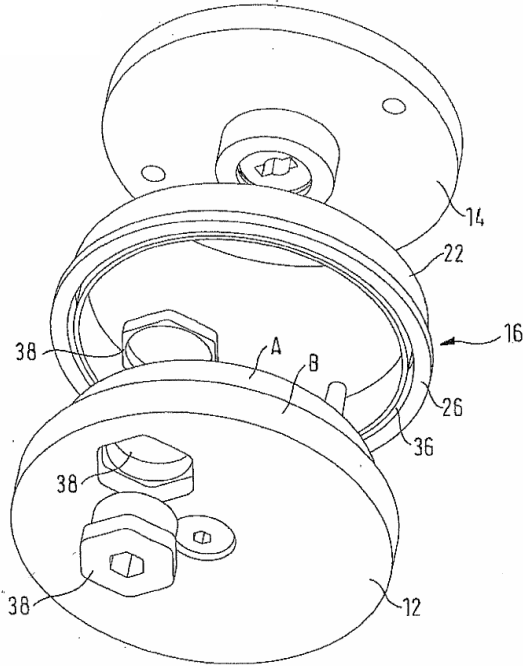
Three-dimensional exploded view of an embodiment of a cover arrangement
